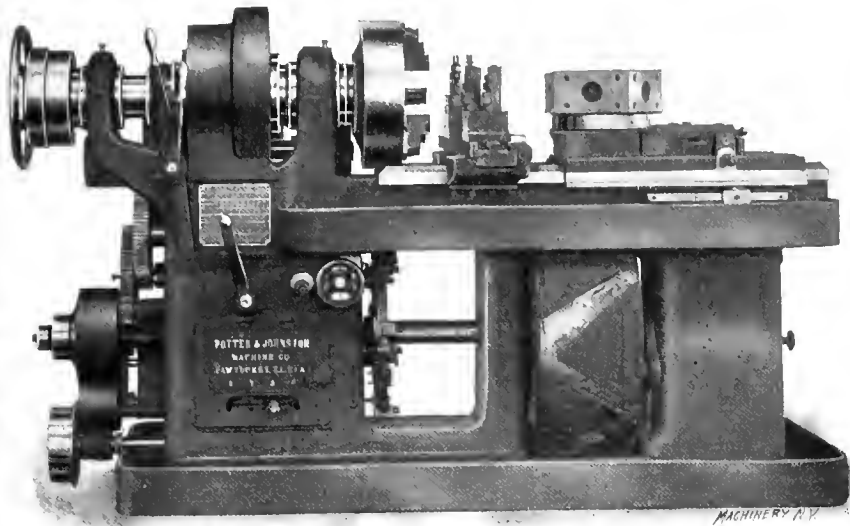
Potter & Johnston Automatic Chucking and Turning Machine, with Two-speed Geared Spindle Drive.
